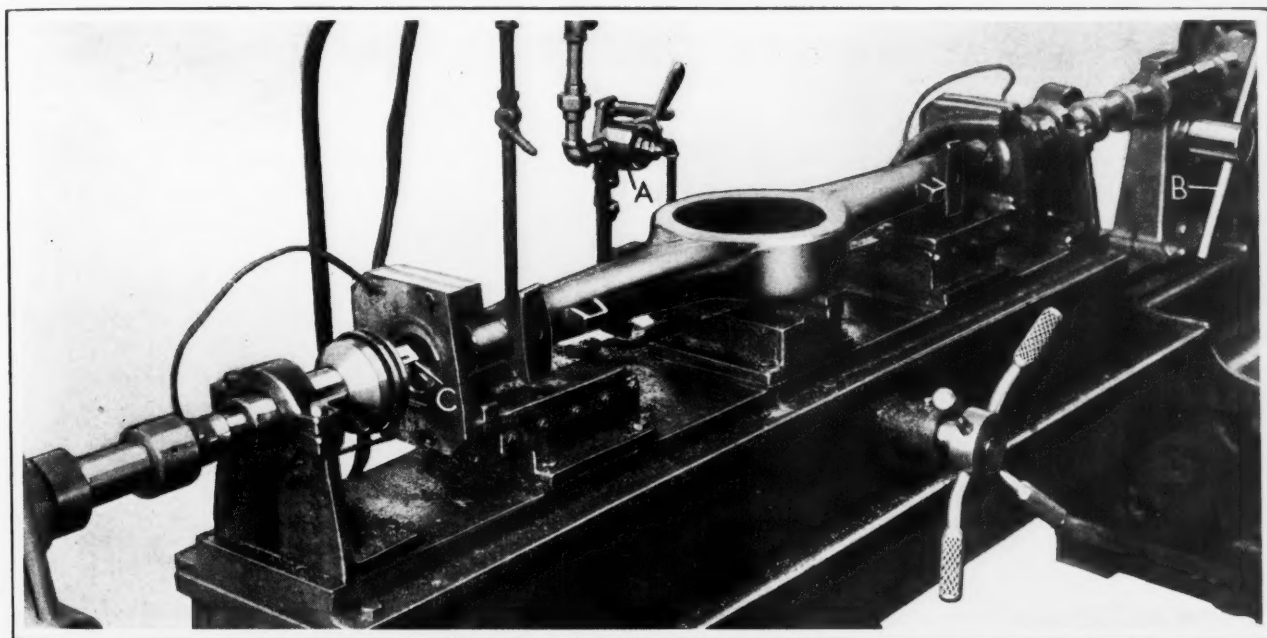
Type of Machine Used for Cutting an Internal Recess in Both Ends of the Housing at the Same Time
